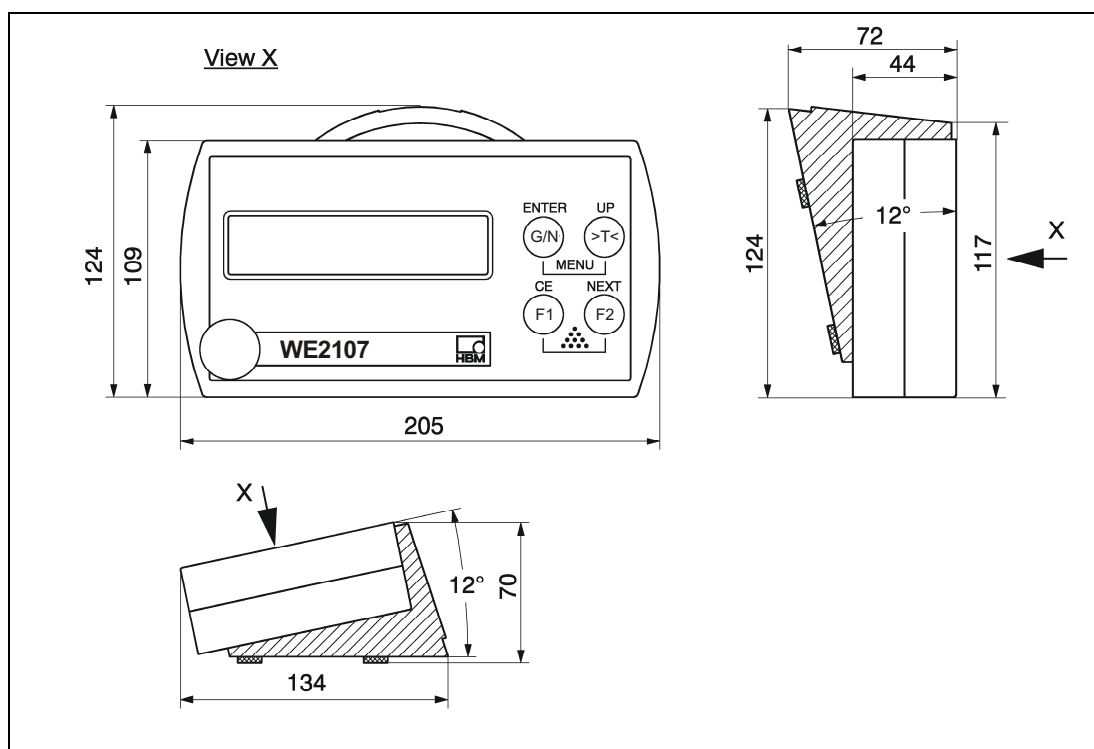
WE2107 dimensions (plastic housing, ABS)
